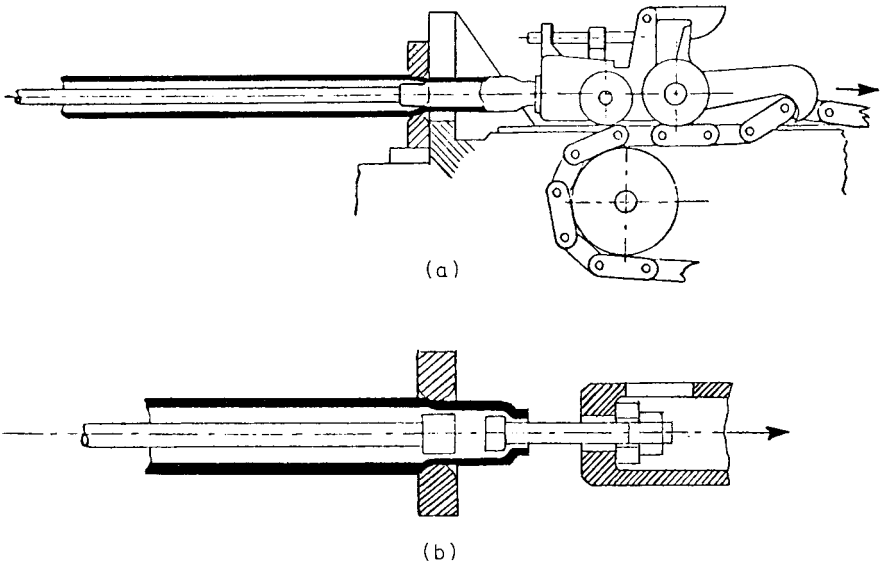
Cold and hot finishings of seamless pipe and tube.
